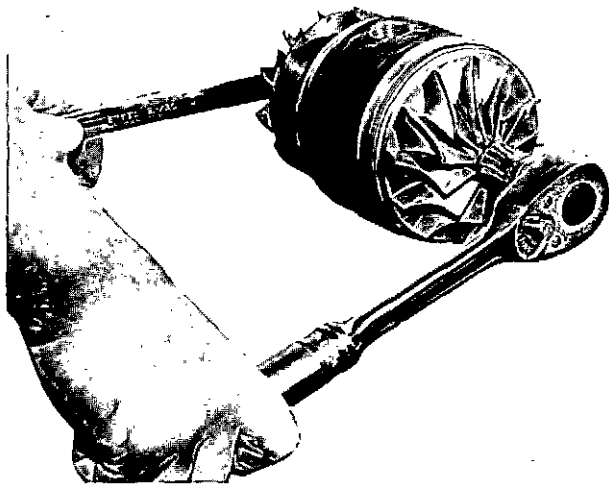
, (T3511). Removing the rotor nut from the rotor assembly
